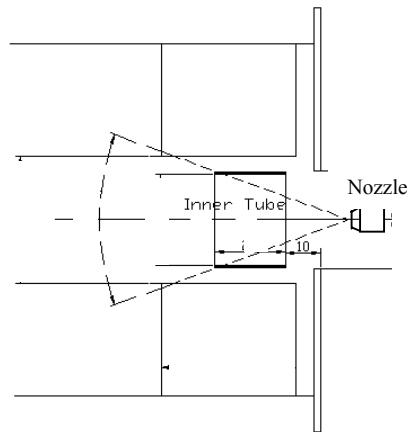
The pre-heating chamber with the Concentric Inner Tube
